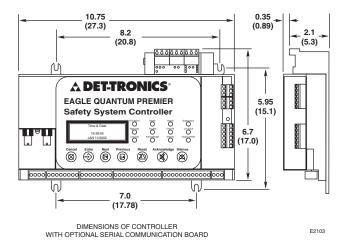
Dimensions of EQP Controller in Inches (Centimeters)
